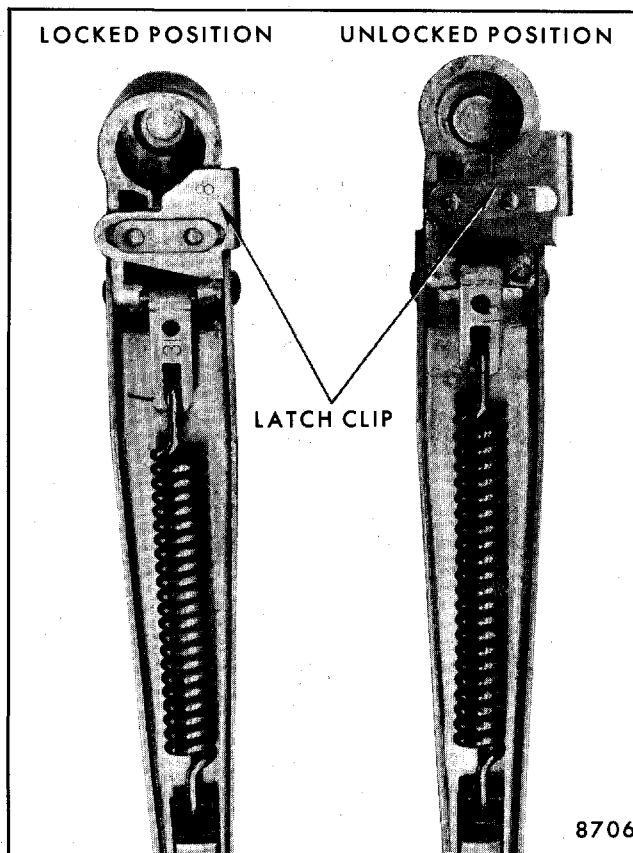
Wiper Arm Latch Clips "B, C, D, K" Styles
